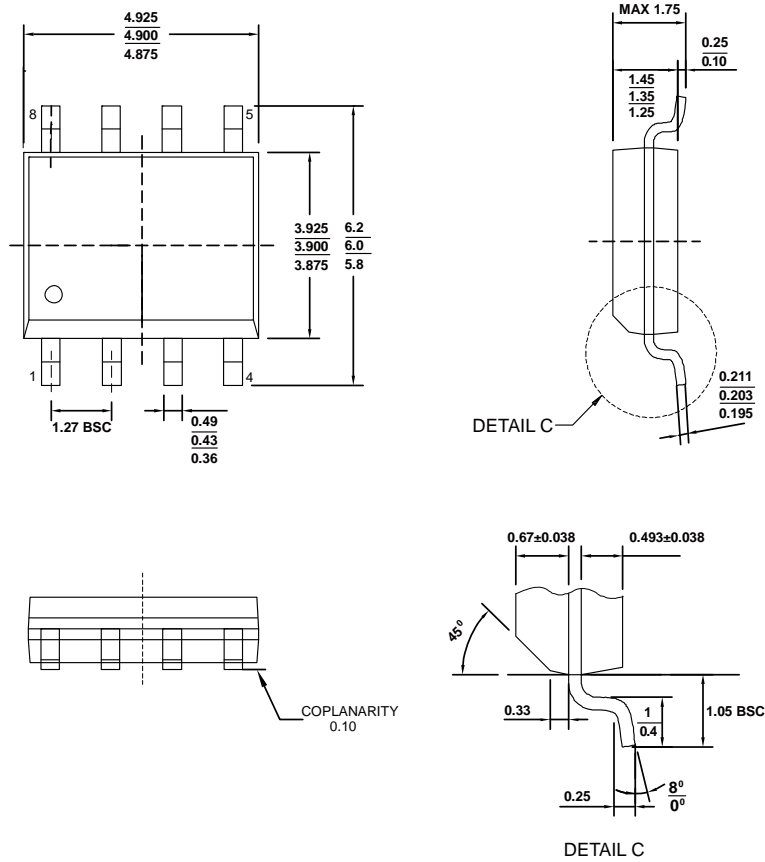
8-Lead SOIC Package Dimensions shown in millimeters
